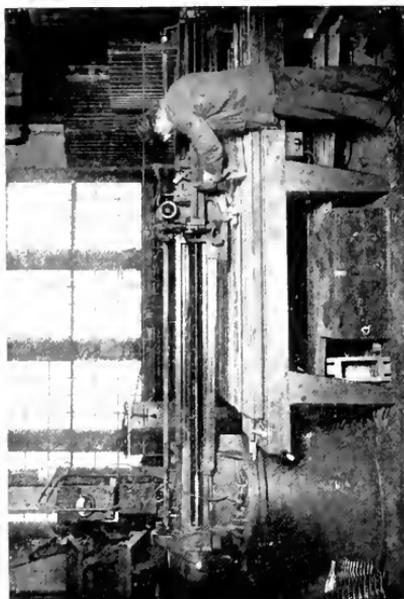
Machine Operator Welding Seams 116 in. Long in Corrugated Sheets
